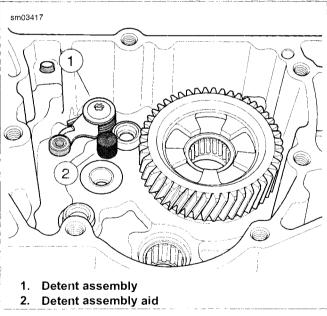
Using Gear Detent Assembly Aid (Part No. B-45520)
